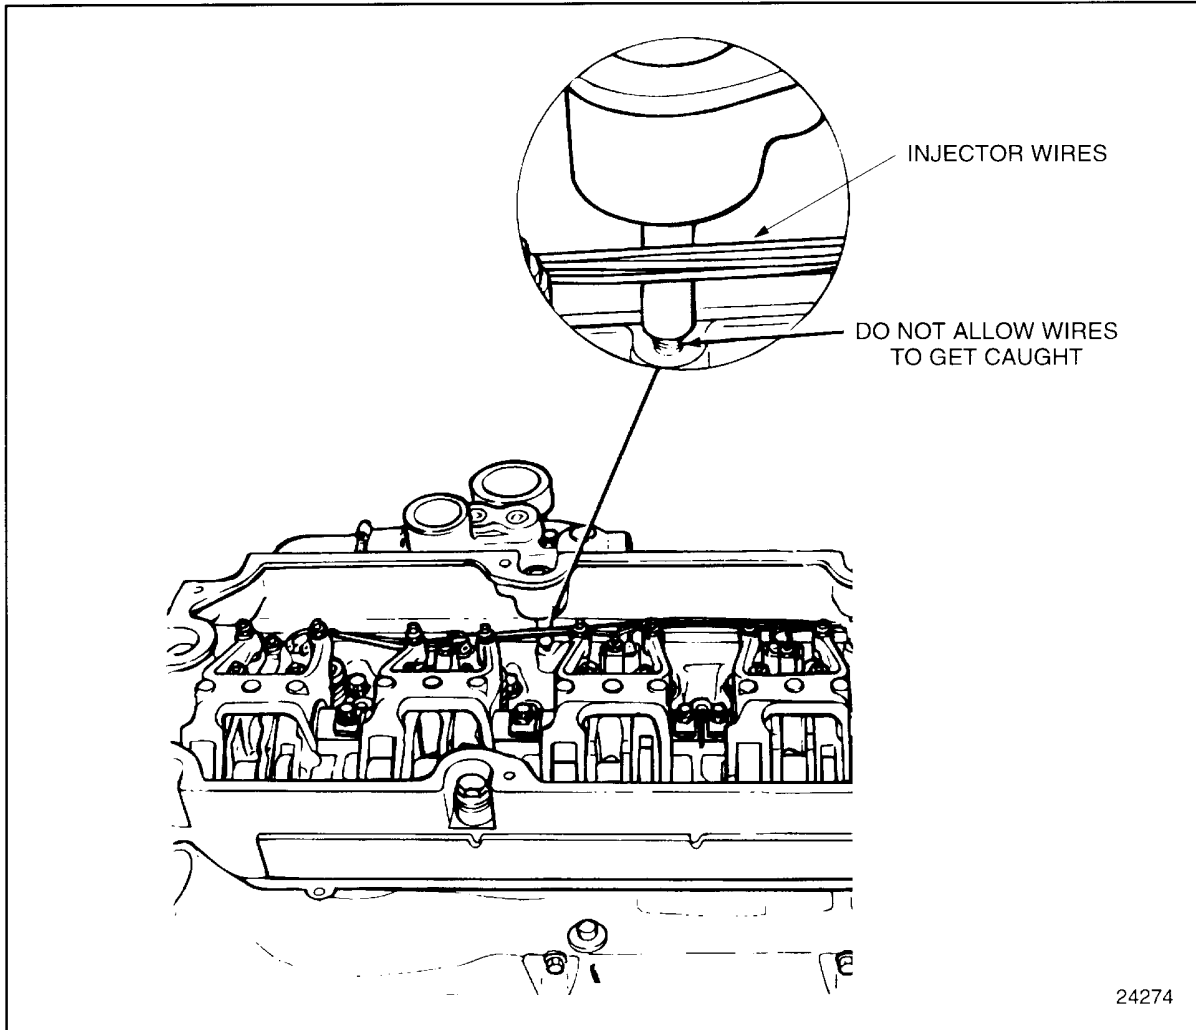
Rocker Cover Base Hold-down Bolt Installation
